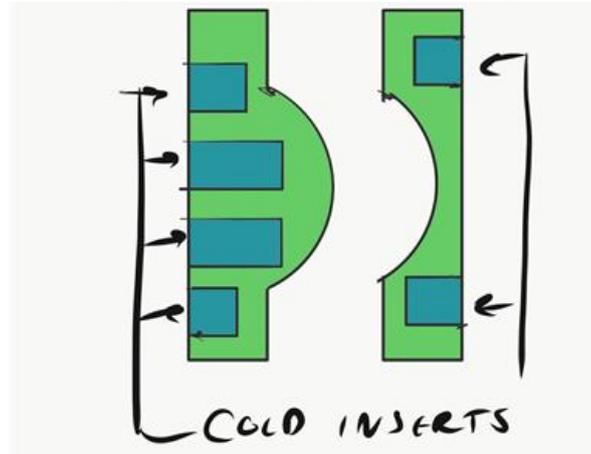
Concept 2: *Cold Inserts* uses cold metal rods in pre made holes to cool the molds.
